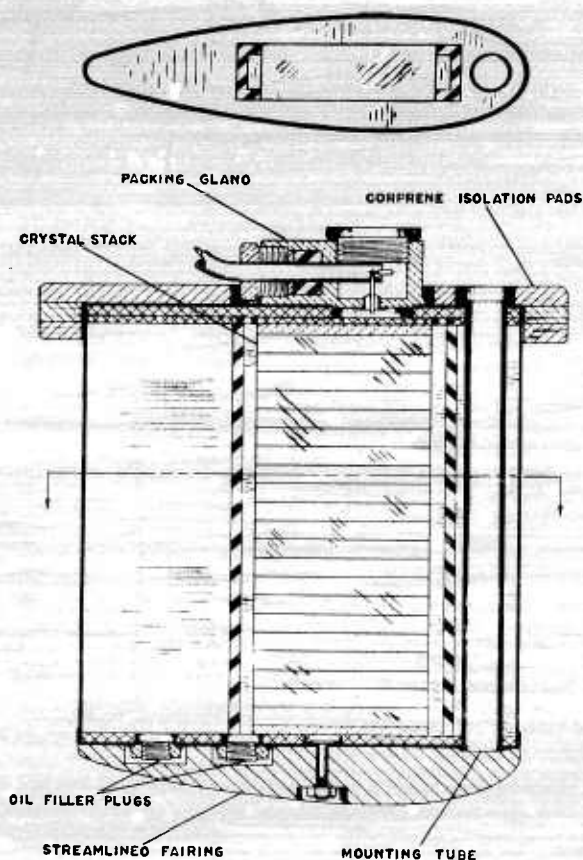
Sectional drawing of KC-2 transducer in NAD-6A.
